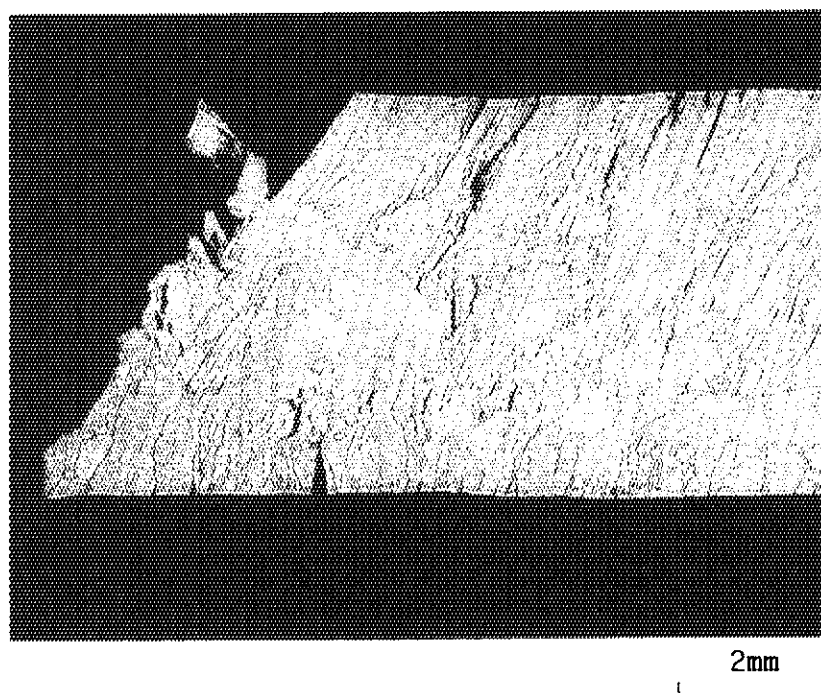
Microstructure of fracture section for Hastelloy XR weld metal (900°C, 890.0h, 45.0MPa, thickness: 15mm, specimen No.JD-2)
